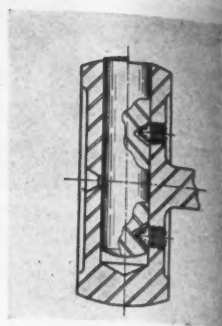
Cross-section View, Showing Inset in "TeBo" Gage
